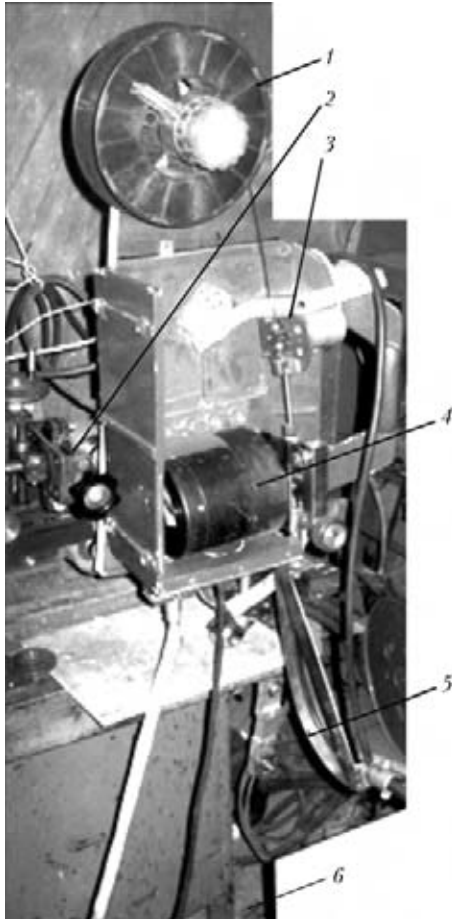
Stand for automatic welding of spots in the vertical plane with pulse electrode wire feed: 1 – cassette with electrode wire; 2 – mechanism of torch movement; 3 – sensor of wire feed rate; 4 – wire feed mechanism; 5 – torch for welding in the vertical plane; 6 – product
